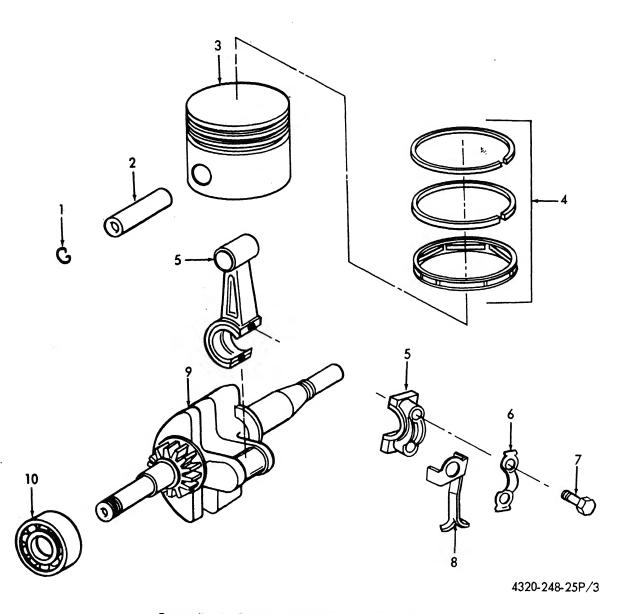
PISTON, CONNECTING ROD AND CRANKSHAFT
